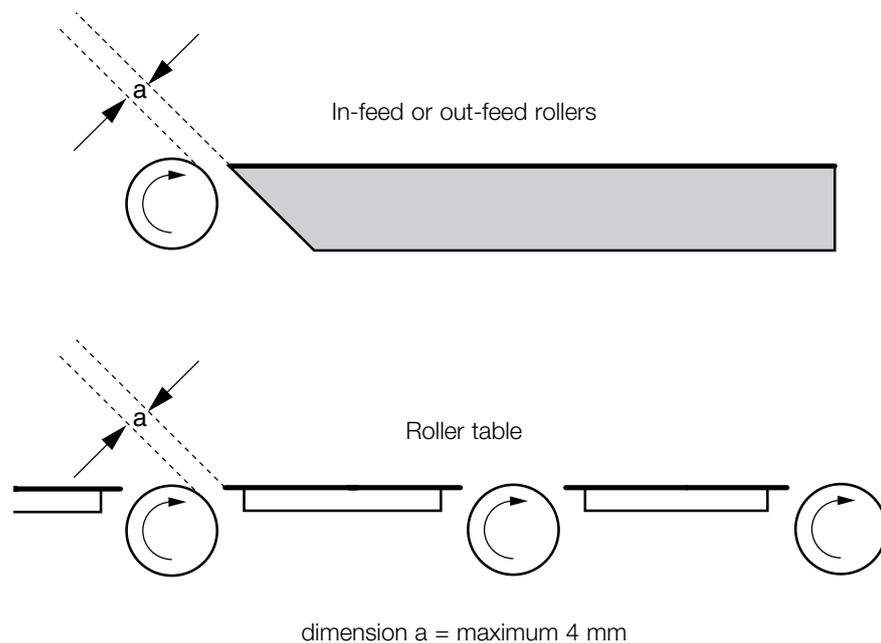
In-filling gaps between rollers and fixed parts in roller table
